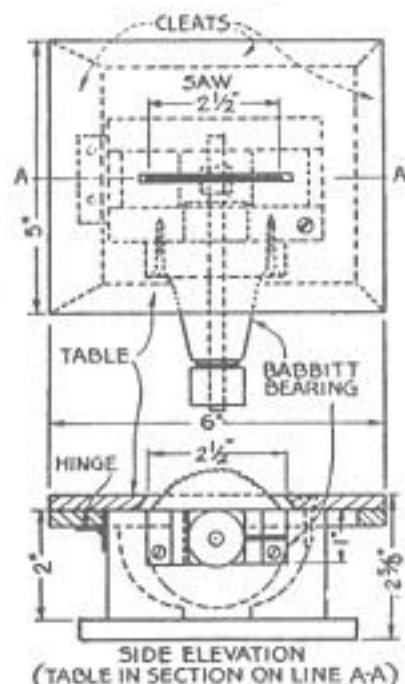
The babbitt bearing is cast in one piece in a wooden mold and is then split.
